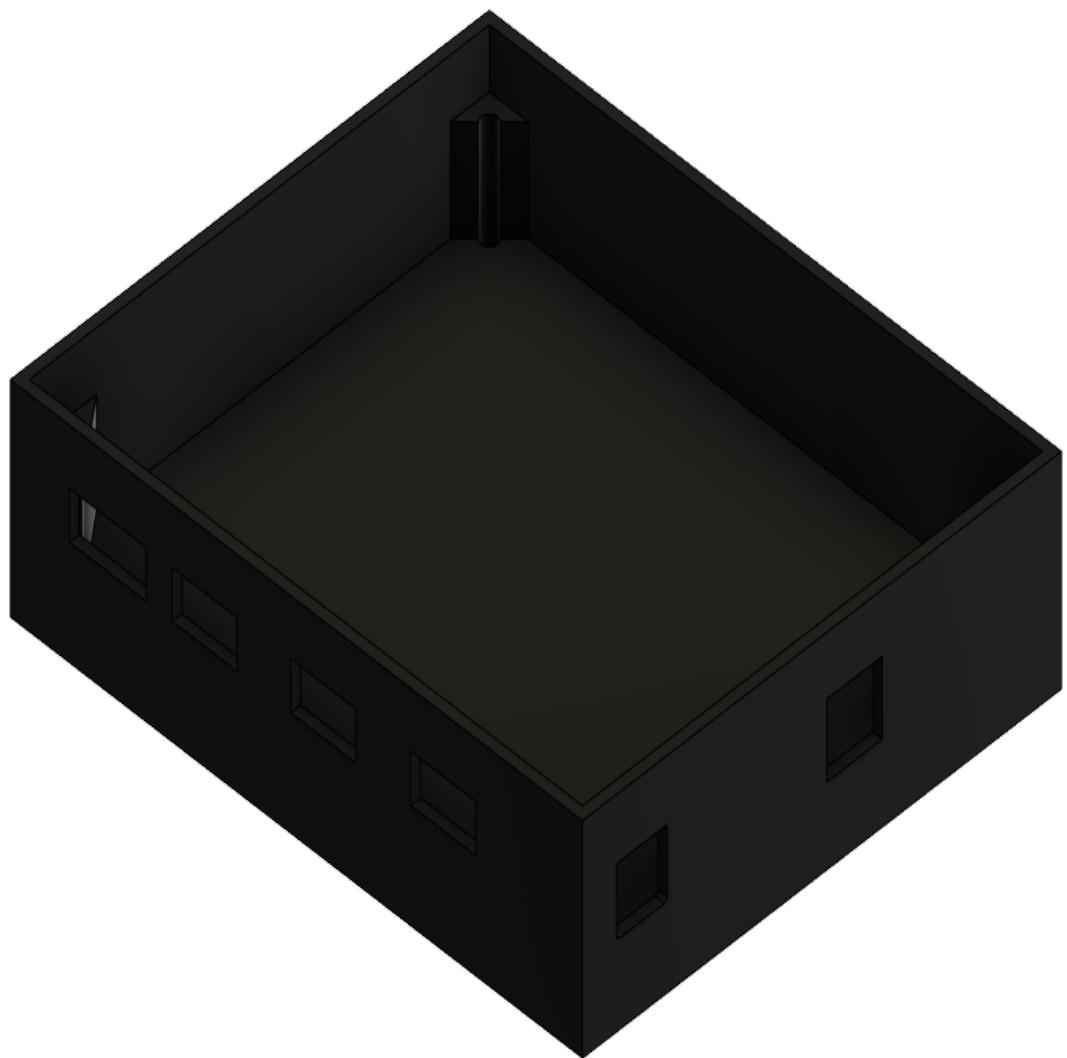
This is a rendering of the 3D model of the bottom half of the enclosure.
